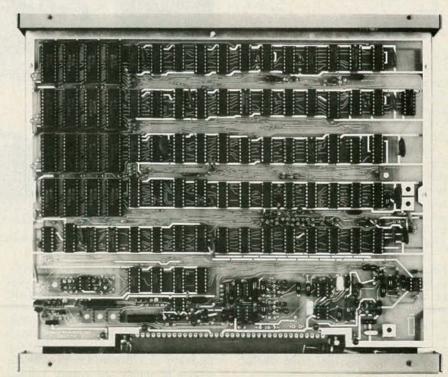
THIS PHOTO shows how the main board should look when it is correctly assembled. It is shown here mounted in the enclosure.
